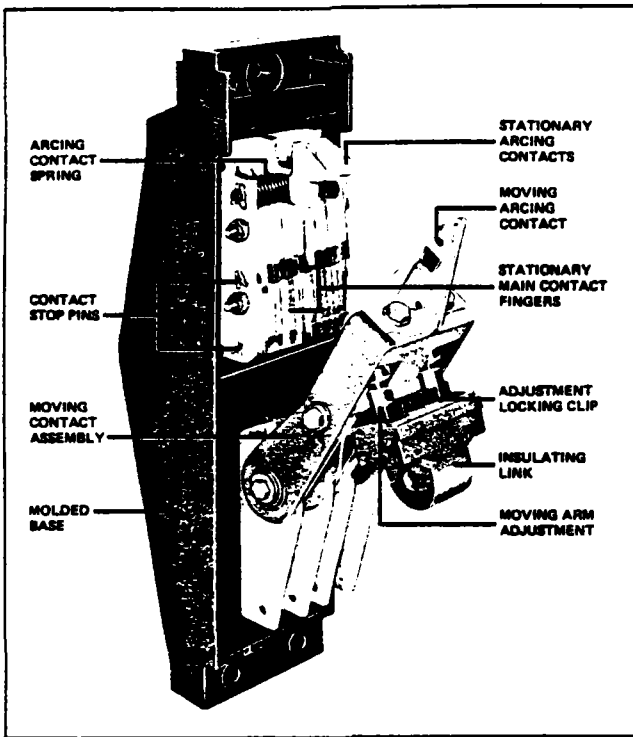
Type DS-632 Pole Unit Assembly - Front View (383418)
